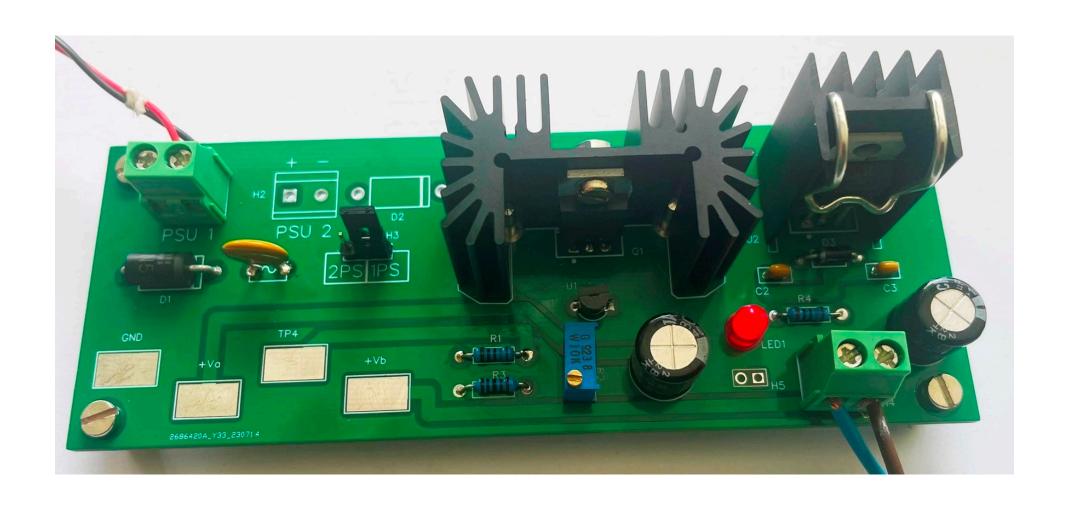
Fully assembled PCB to supply 5Vdc at 1.5 amps.
